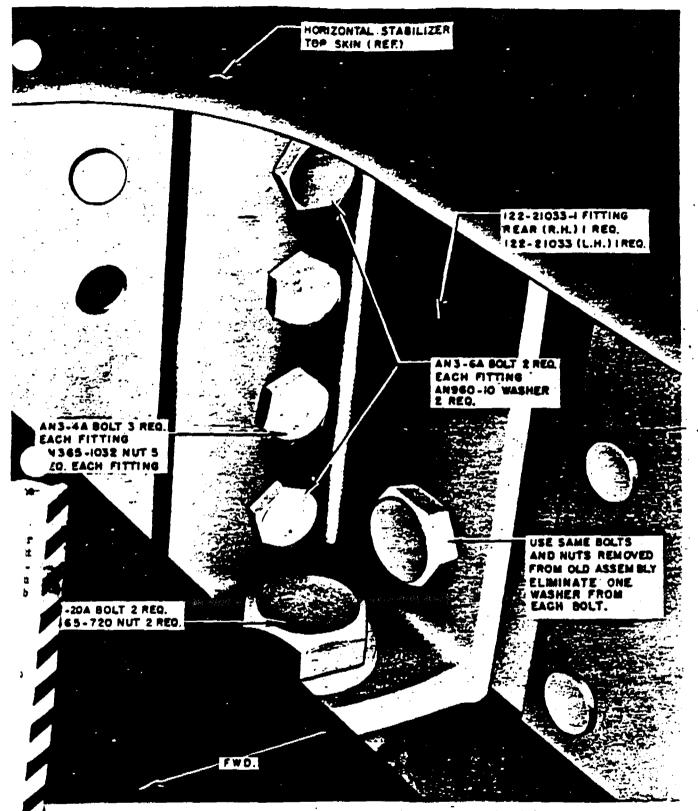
View Showing Rear Casting Installed - Horizontal Stabilizer
